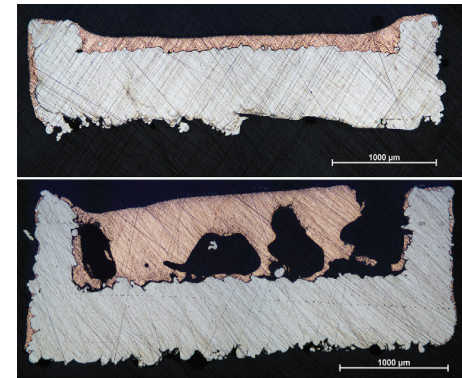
sintered paste in additively manufactured specimen; top: 250 µm paste thickness, bottom: 750 µm paste thickness (© Fraunhofer IWU)
